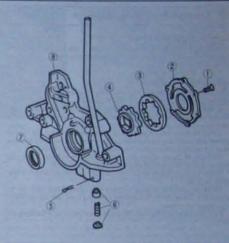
Exploded view of the oil pump (Sec 24)
